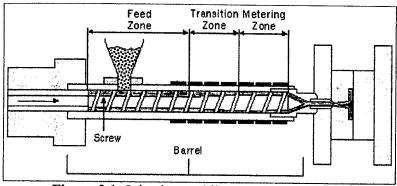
Injection molding machine. (Source: www.wikipedia_.injection_moulding.com).
